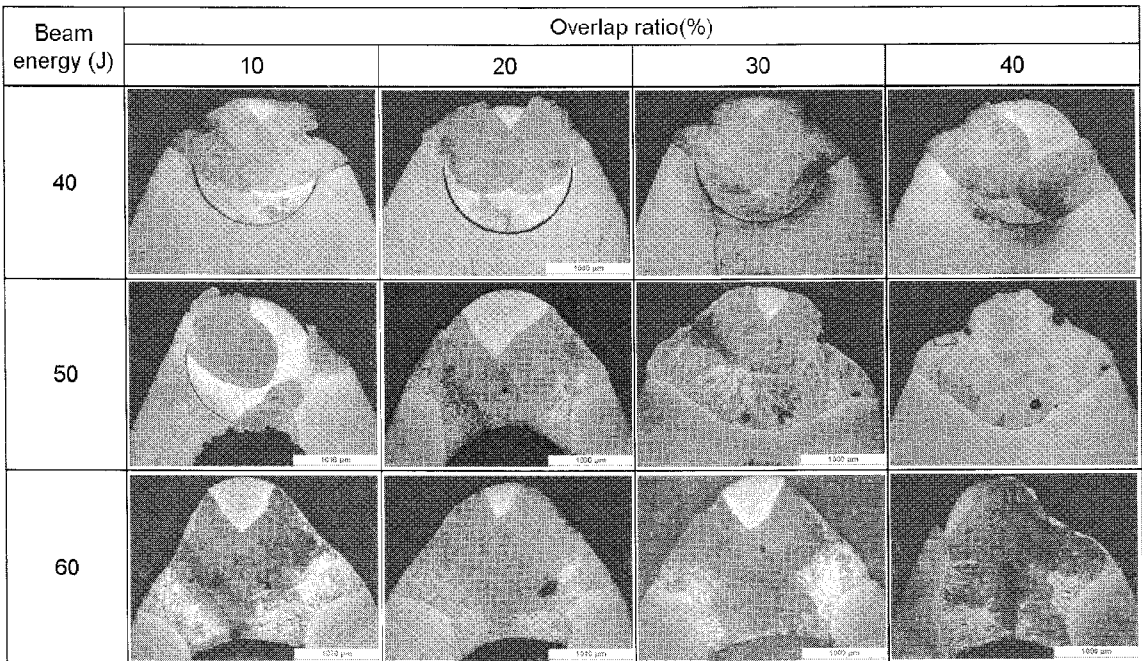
Cross sectional after laser welding of rapid palatal expander
